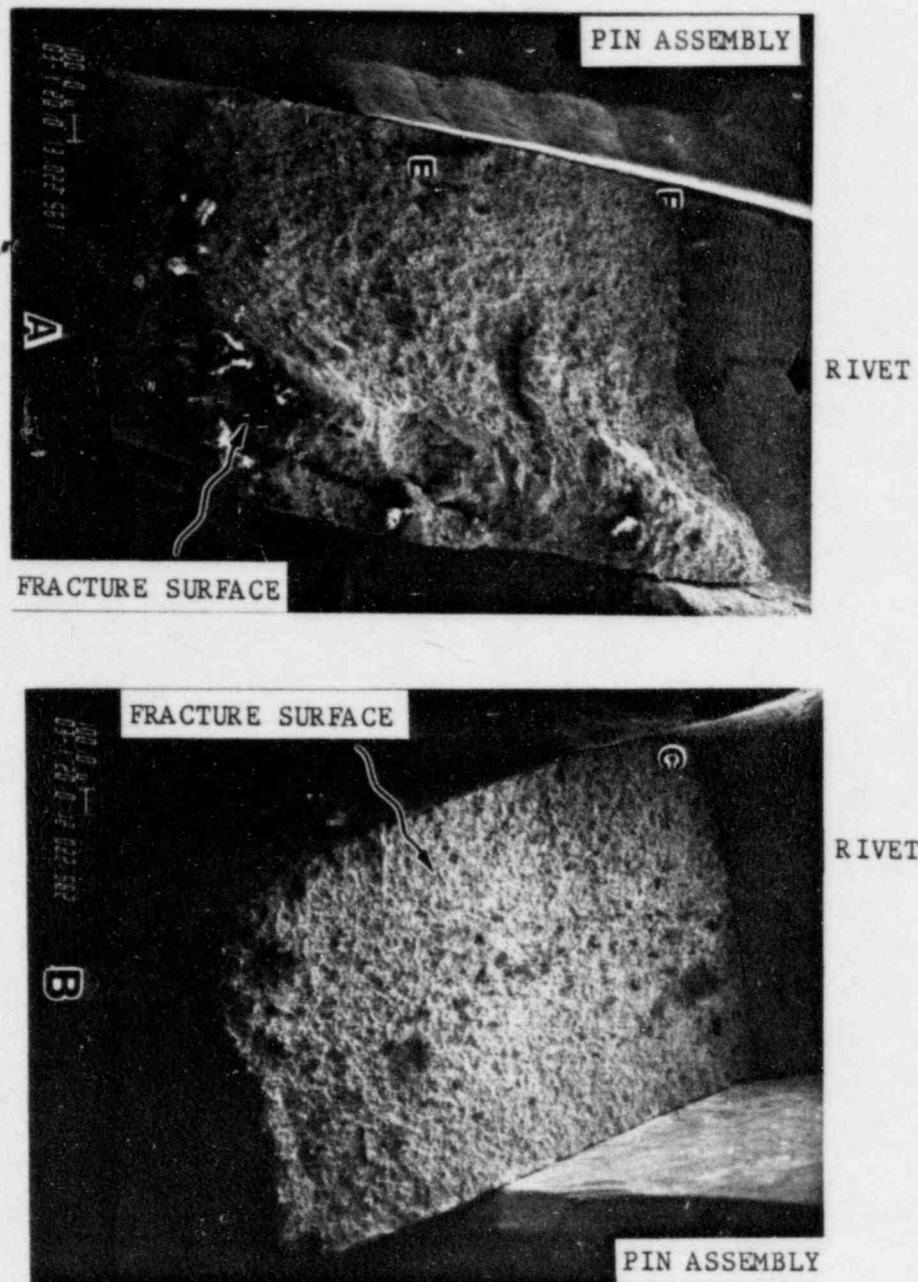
Higher Magnification Views of In Situ Fractures in Figure 37
